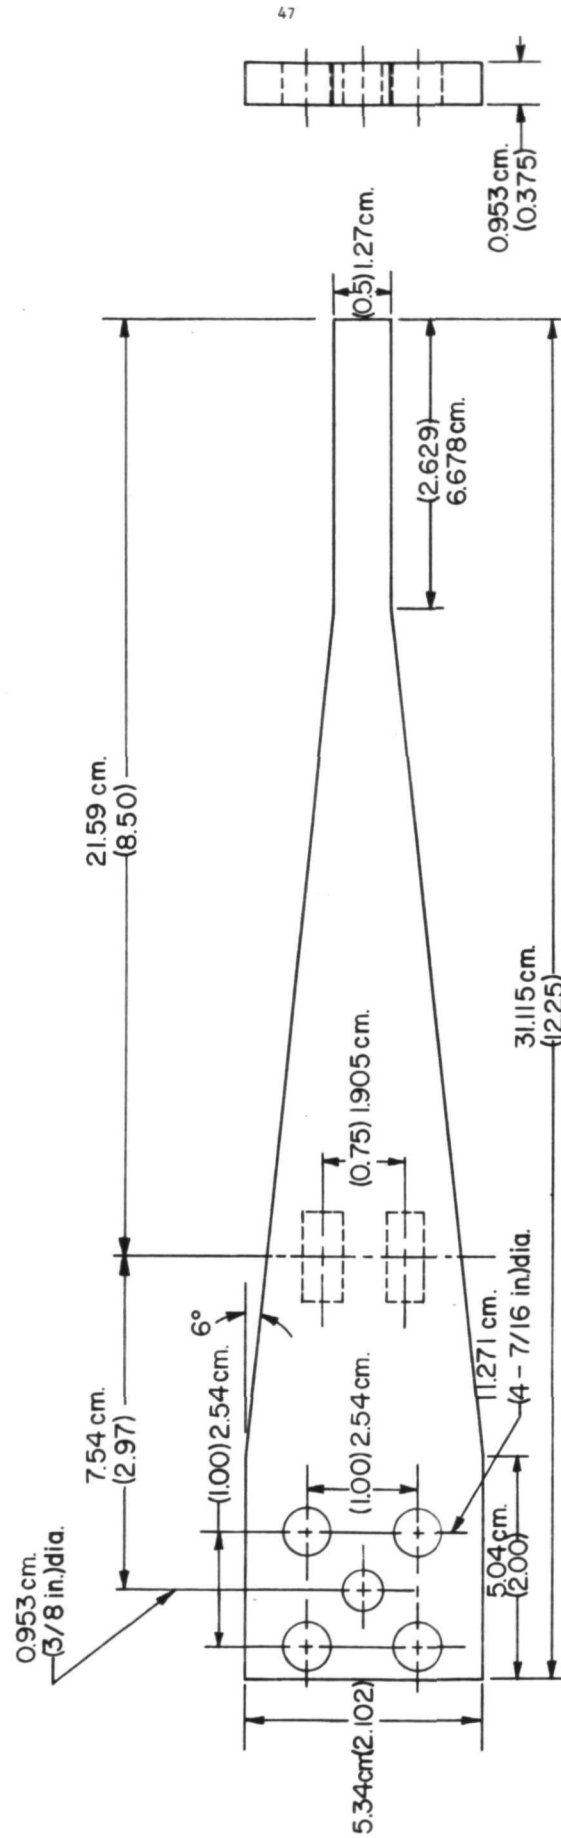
SPECIMEN GEOMETRY AND GAGE LOCATIONS
